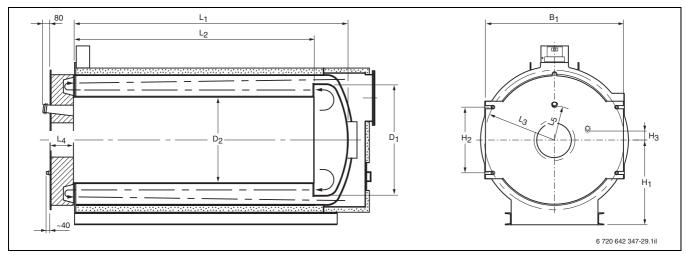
Combustion chamber dimensions Logano S825L LN, boiler sizes 750 to 3500 (dim. in mm)
